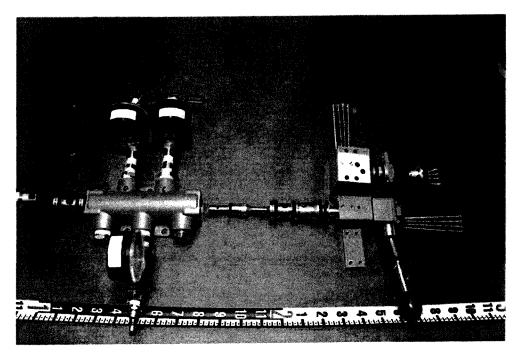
Close View of Exemplar Versa Bottom Dump Valve Components
